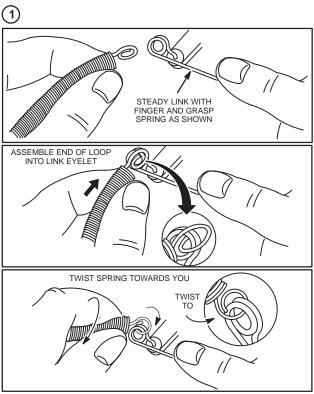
ASSEMBLE SPRING TO LINK EYELET
